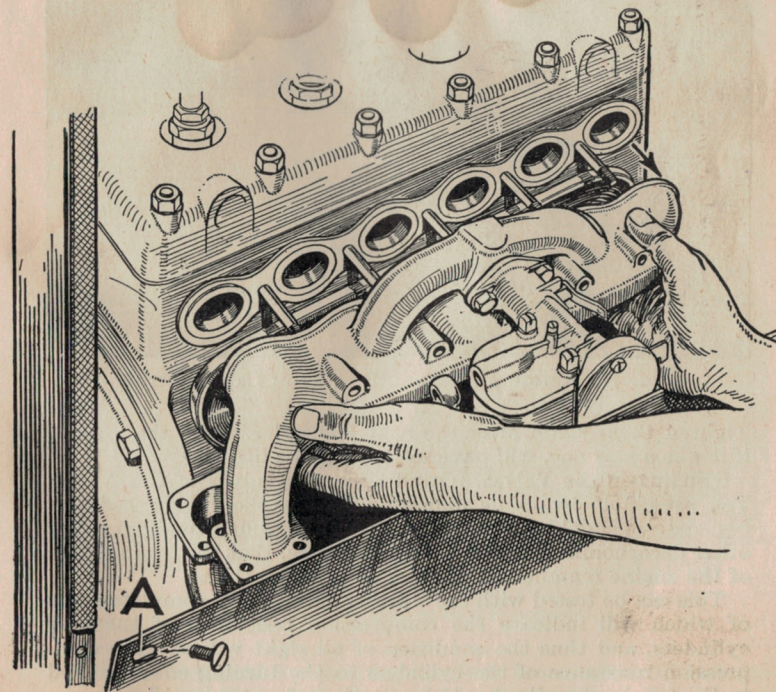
REMOVING THE CARBURETTOR AND MANIFOLD COMPLETE
